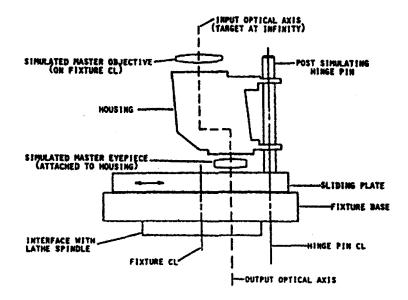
Schematic of the prism adjusting and holding fixture used to machine the binocular body housing with a prealigned prism installed. (From Trsar et al.¹⁵)
